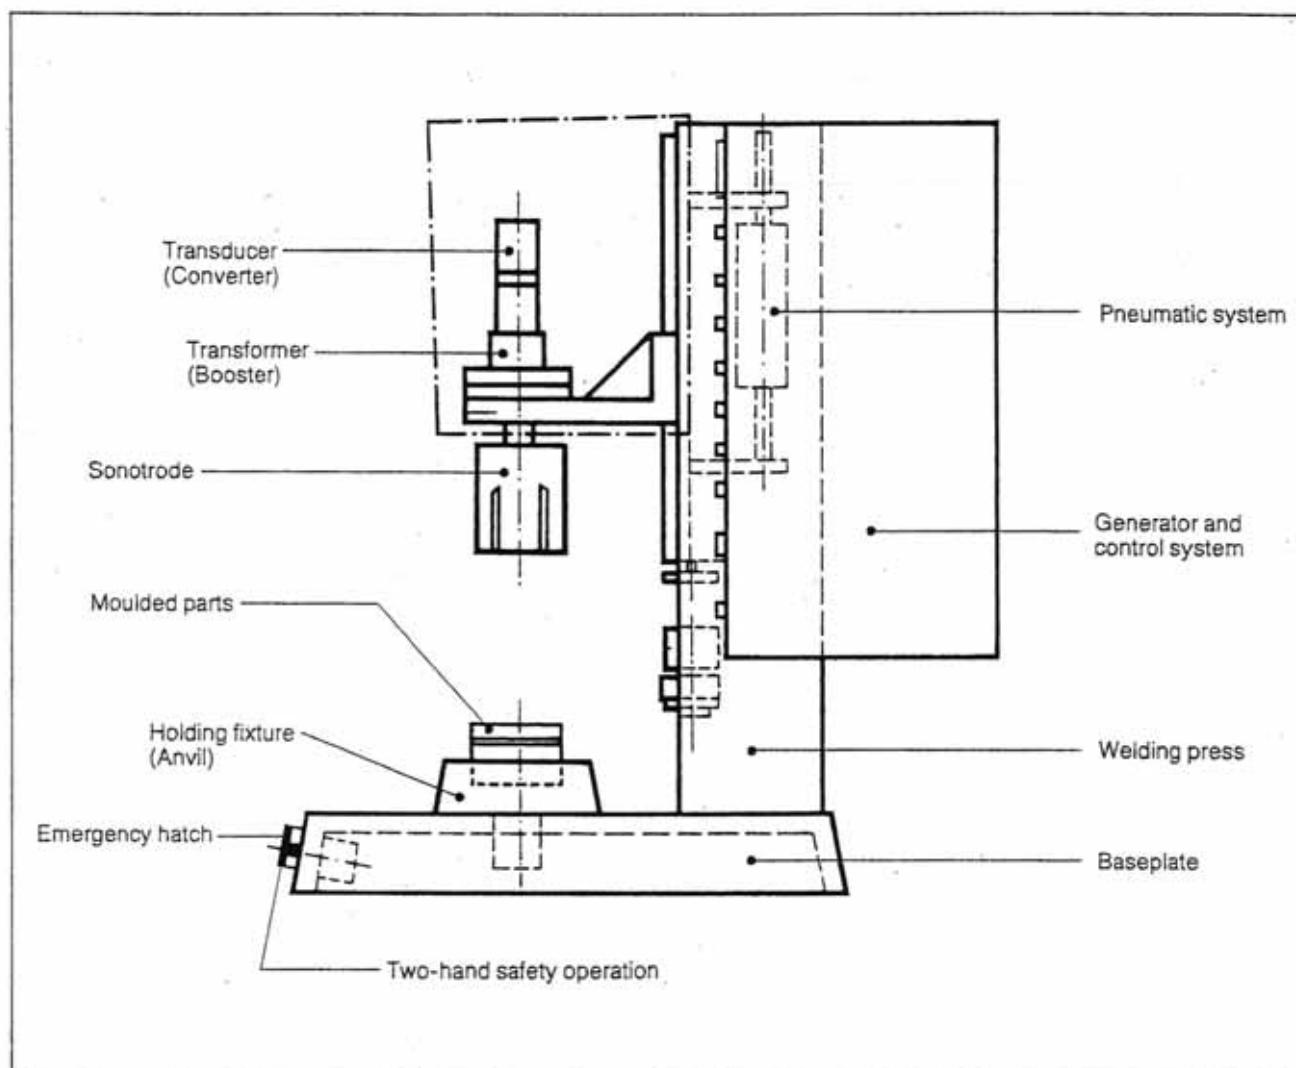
Diagram of construction of an ultrasonic welding apparatus
